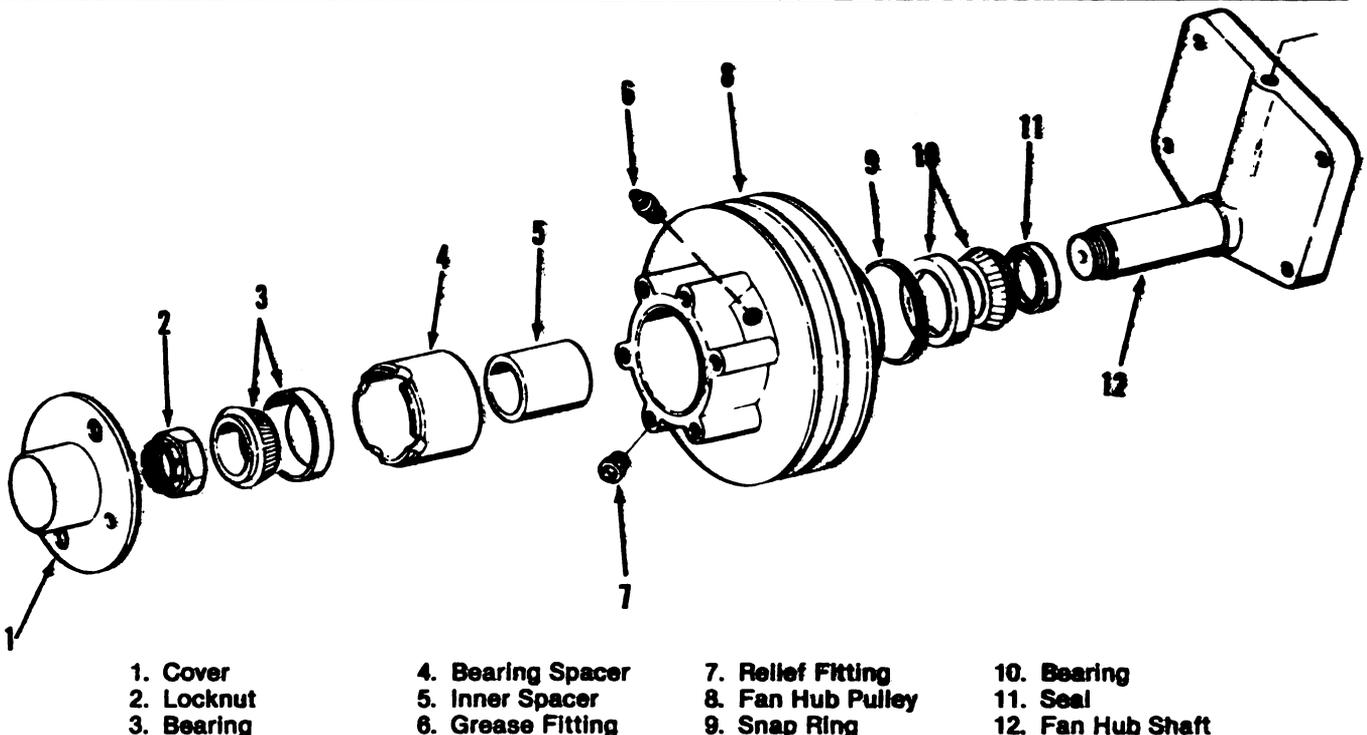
Fan Hub Assembly With Bearing Spacer.
